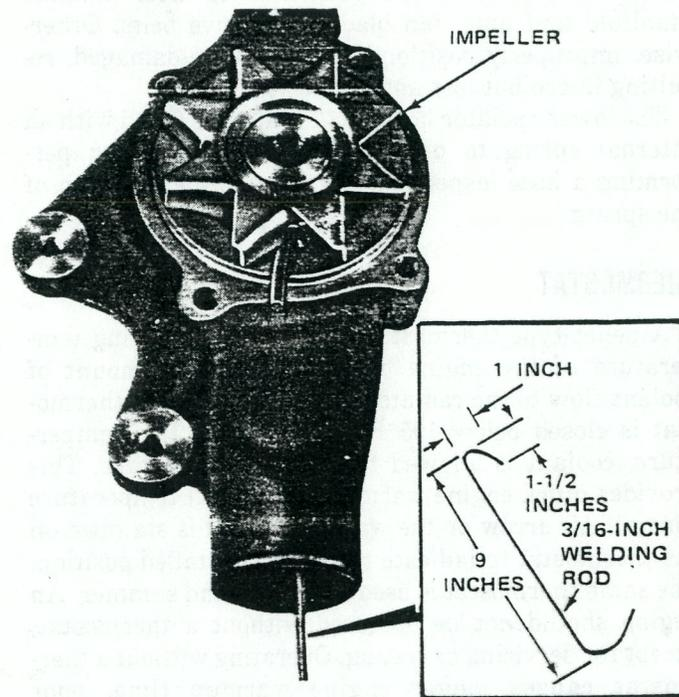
C-5 Testing Water Pump for Loose Impeller—Typical
